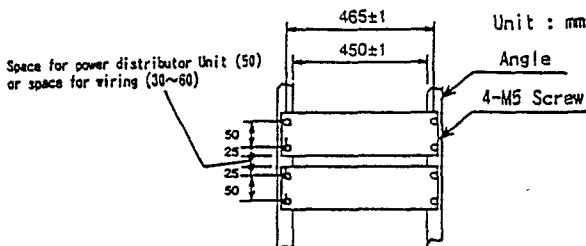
PANEL (WALL) MOUNTING DIMENSION
